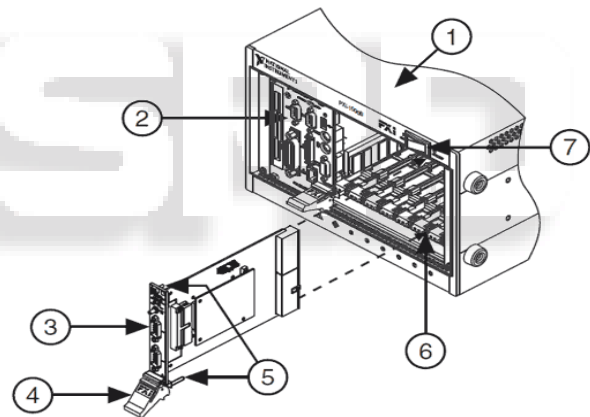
Installing A PXI/PXI Express Module In The Chassis: (1) PXI/PXI Express Chassis, (2) PXI/PXI Express System Controller, (3) PXI/PXI Express Module, (4) Injector/Ejector Handle, (5) Front-Panel Mounting Screws, (6) Module Guides, And (7) Power Switch
